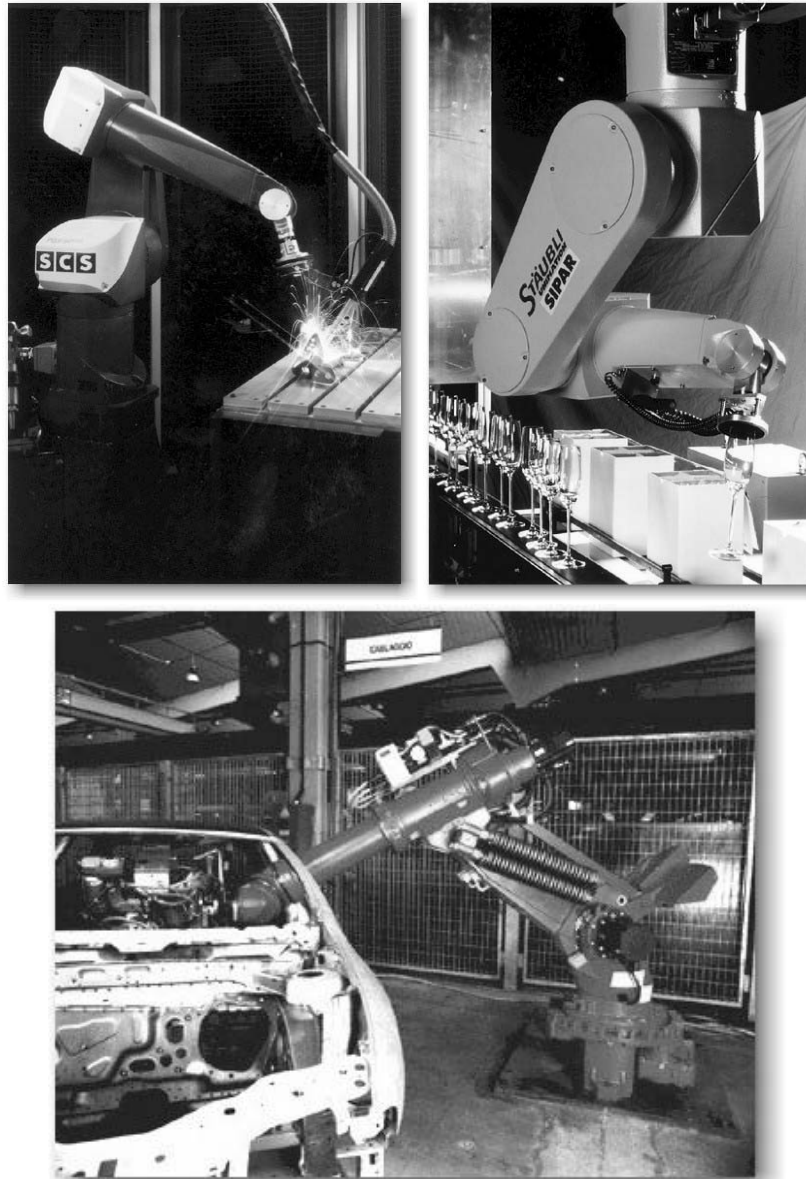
Typical industrial serial robot applications: welding; packaging; assembly.
